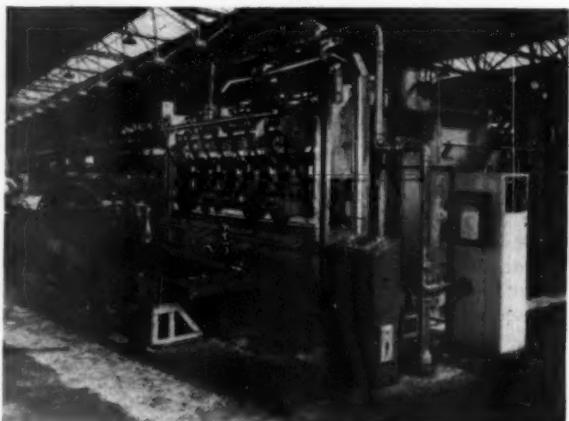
A continuous pusher furnace for heating billets for forging.
